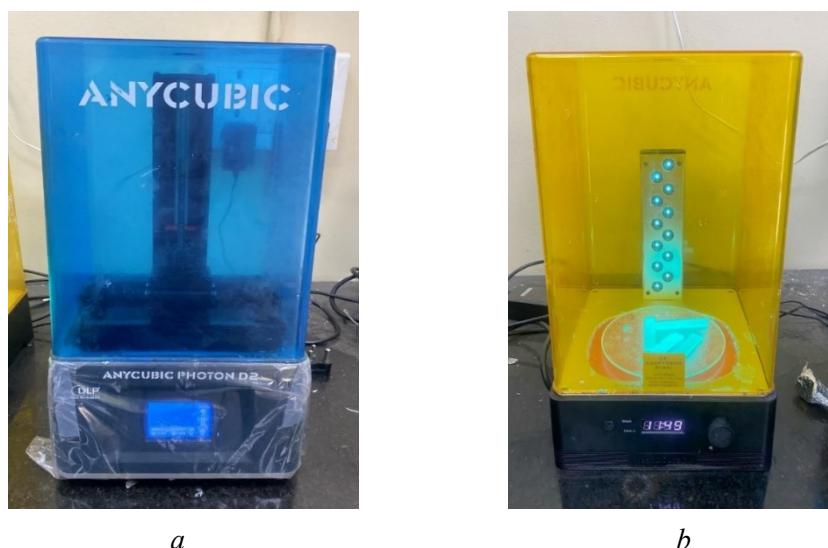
DLP 3D Printing method: DLP 3DPrint (a), Wash and Cure Machine (b)
